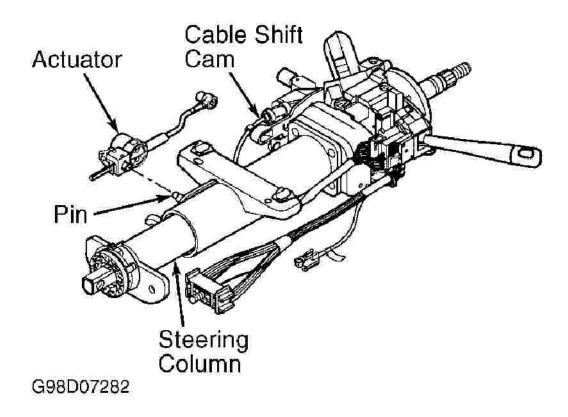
Locating Shift Interlock Assembly (Typical) Courtesy of GENERAL MOTORS CORP.
